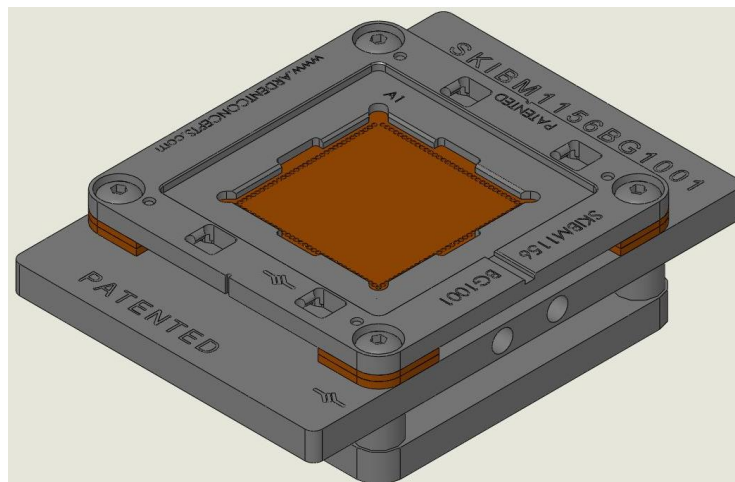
Typical shipping configuration for LGA and BGA sockets.
